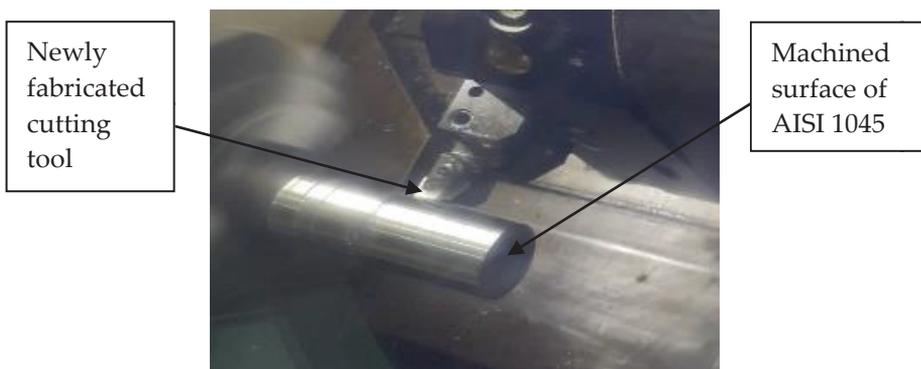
Alumina cutting tool on tool holder when machining AISI 1045
